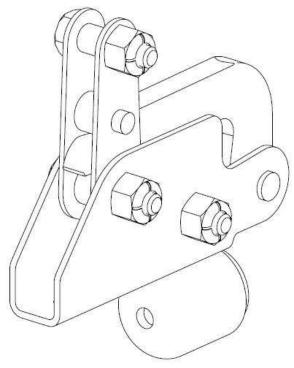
"Weld On" Tow Hook Assembly with Optional Bumper Stop, P/N: 6028
